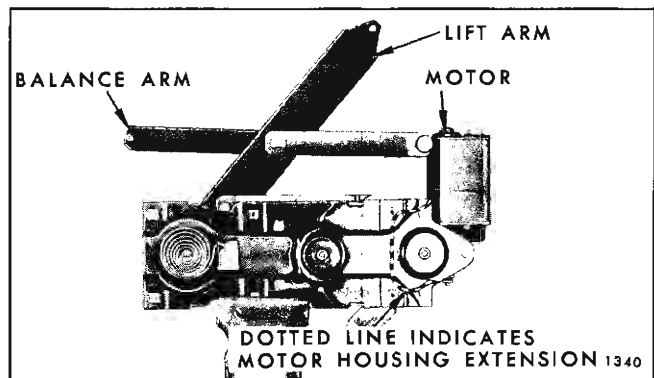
D31—Door Window Regulator and Electric Motor Assembly
